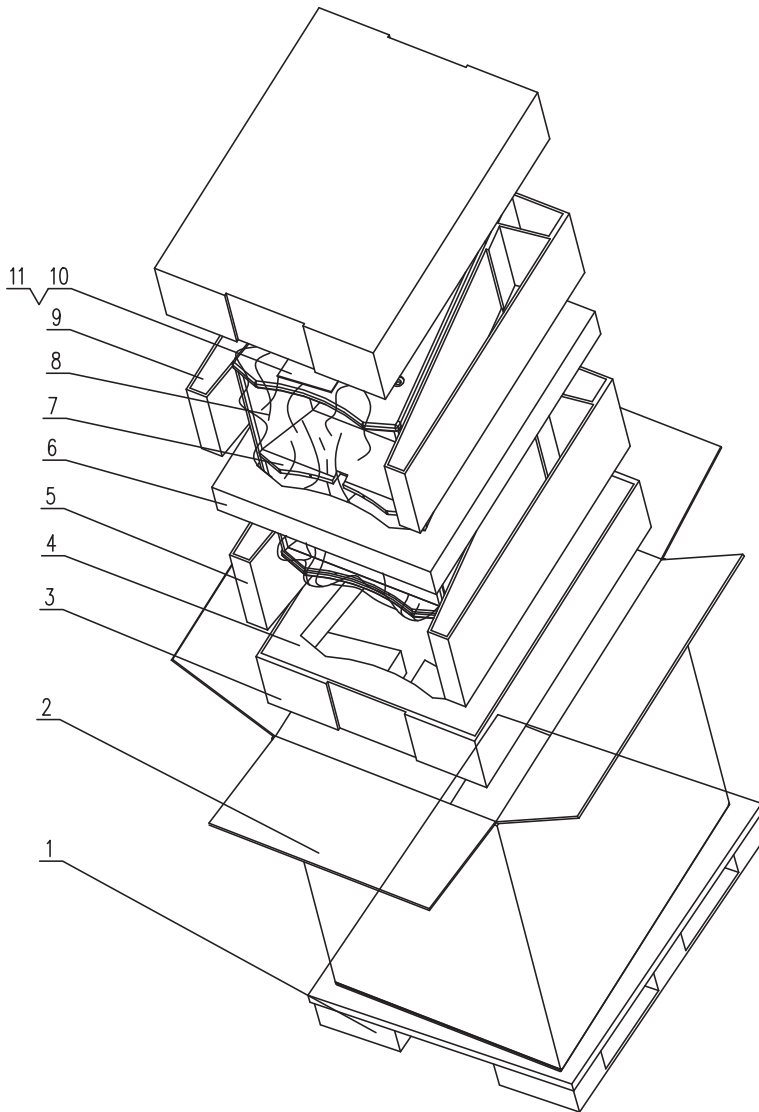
Panaray LT 3202 WR Loudspeaker Packaging View
